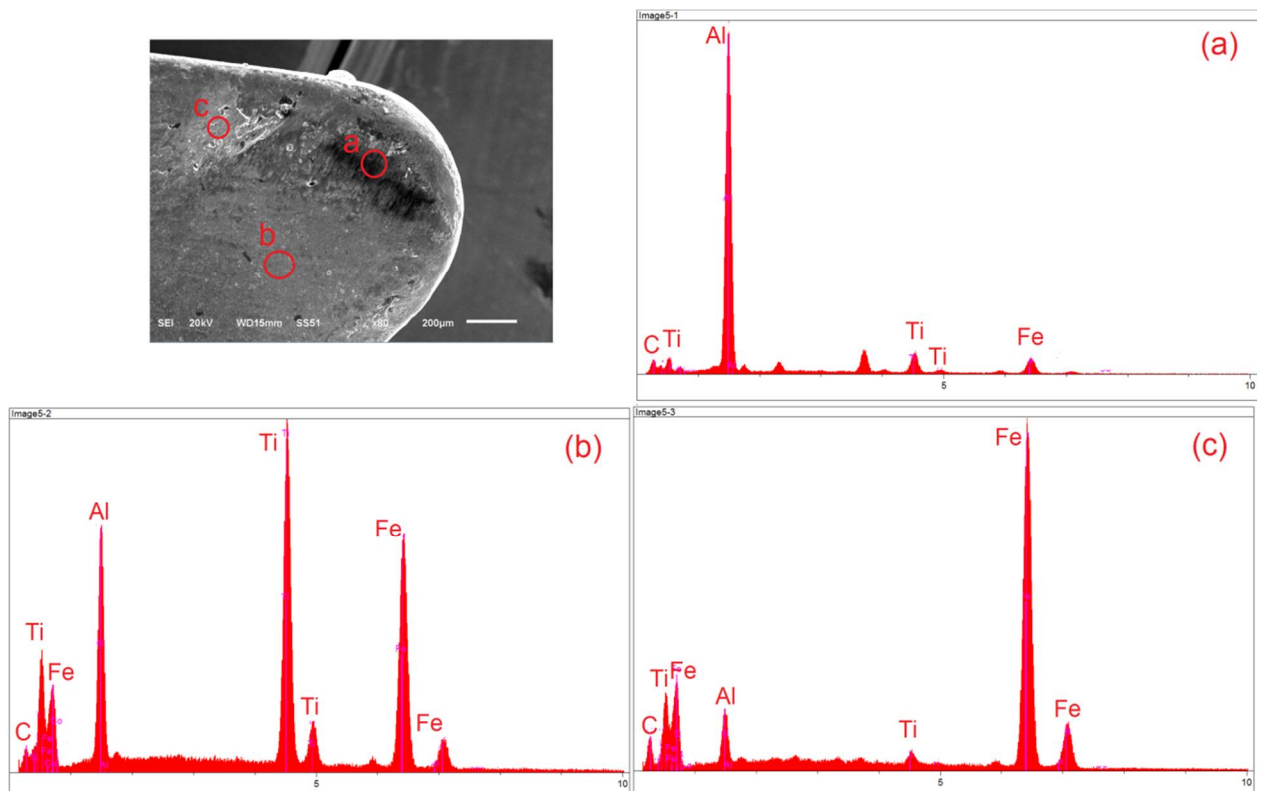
SEM/EDX images of cutting tool used at 179 m/min cutting speed after third turning process (L=1428 mm)
